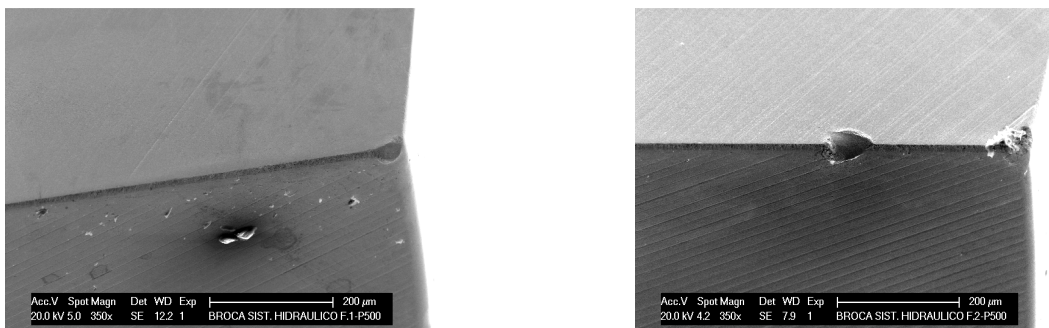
Wear of the drill cutting edge of hydraulic system after pickling with NaOH solution on faces 1 and 2 on the drilled part 500.
